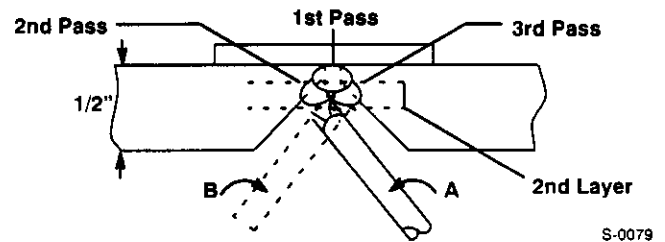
Multi-Layer Deposit – Overhead Butt Weld
